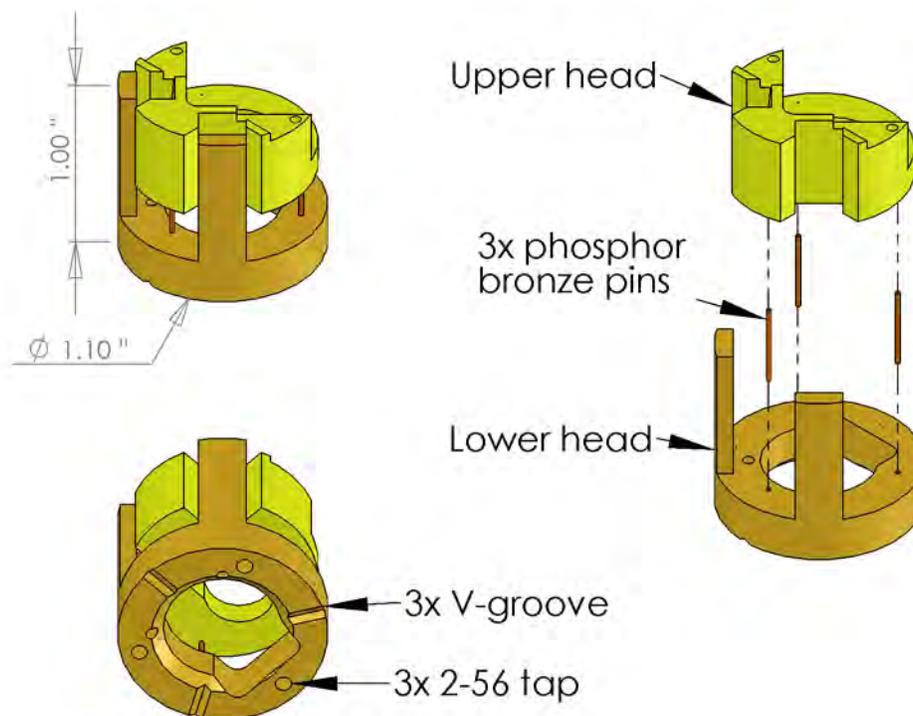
Isometric projections of the microscope head. The head is assembled from five parts; the upper and lower head, both made of brass, and three phosphor bronze spring posts. An exploded view (right) shows how the five pieces fit together prior to epoxying the spring posts in place. (lower left) Three V shaped grooves on the bottom face of the lower head ensure its orientation is held constant with respect to the cage and sample. Three 2-56 tapped holes allow for the connection of springs between the head and the cage.
